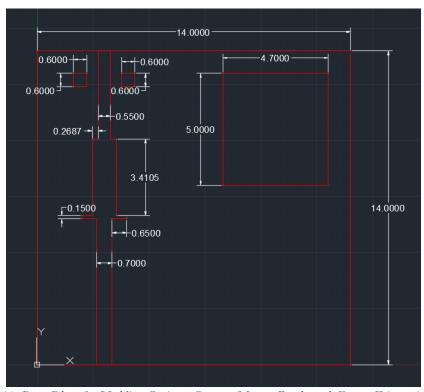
Base Plate for Holding Syringe, Stepper Motor, Rack and Gears, Dimensions in cm
